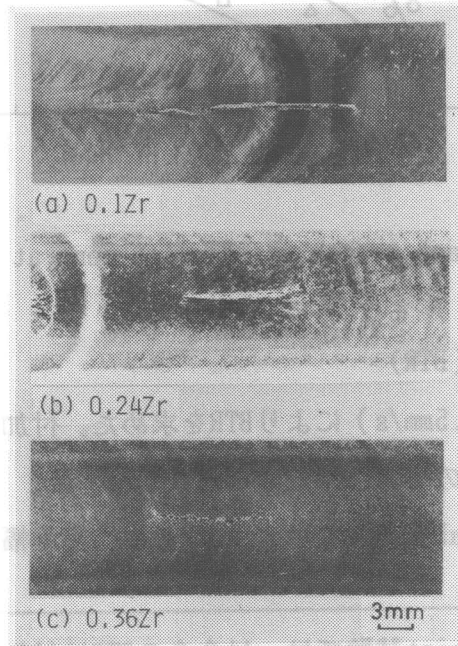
Appearance of weld bead showing cracking: 0.23mm/s \dot{D} , 0.7mm displacement.
